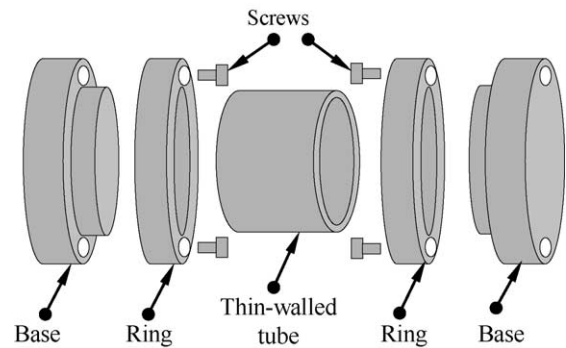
Exploded schematic of the new specimen design. Note that the material under investigation is the material of the thin-walled tube.
